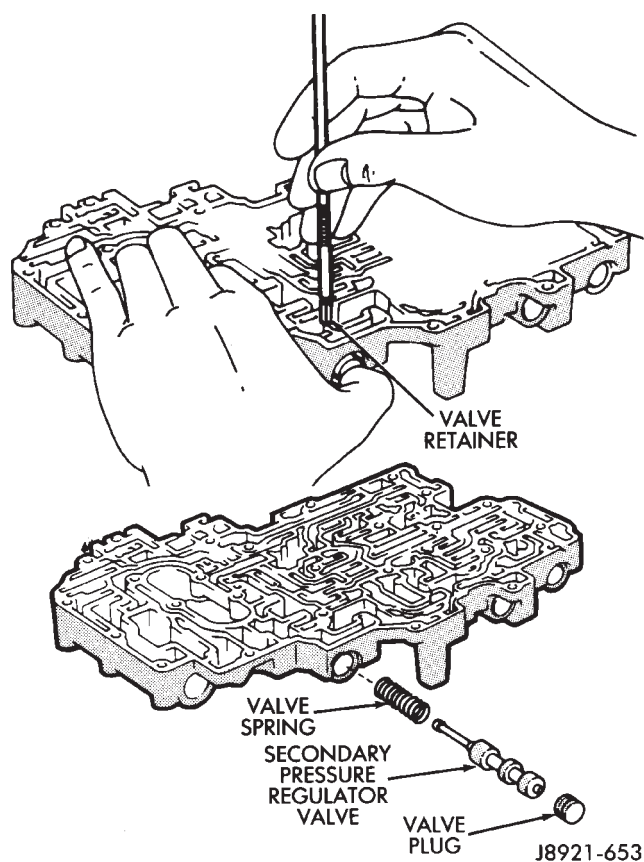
Removing/Installing Secondary Pressure Regulator Valve
